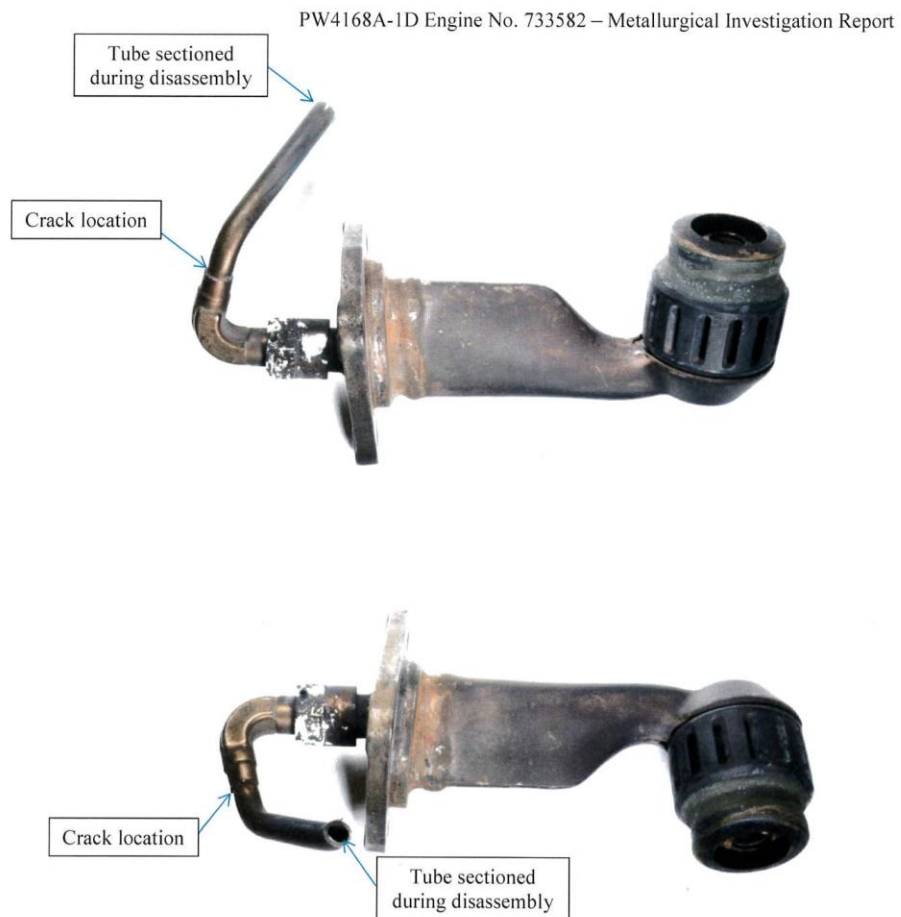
Overall appearance of the fuel nozzle and partial fuel manifold in the as-received condition.
